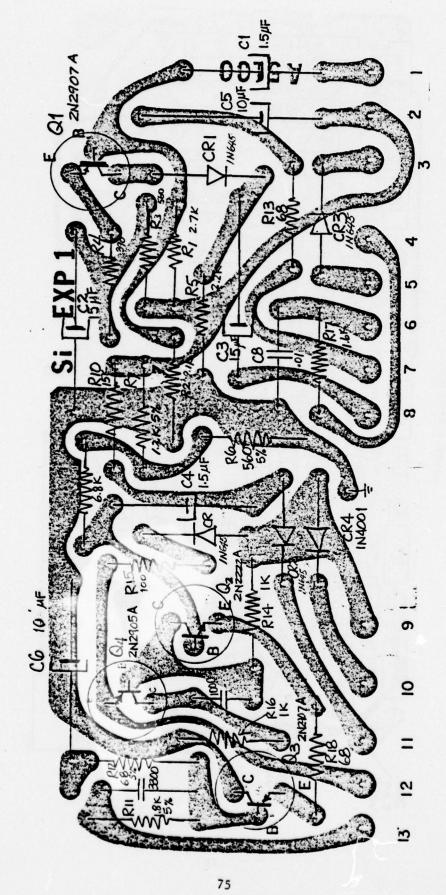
P.C. BOARD LAYOUT FOR THE A5100A AUDIO AMPLIFIER ASSEMBLY
